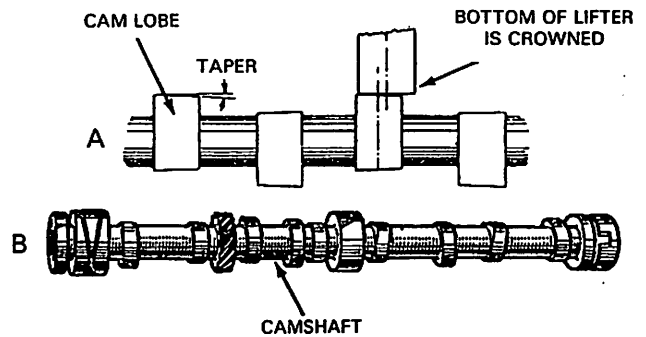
A—Section of camshaft showing one method of tapering cam lobes. Lifter bottom is crowned. B—Typical camshaft design.
